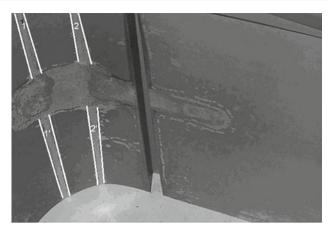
The insulating coating of the laminations can be damaged when there is improper handling of the core steel during steel manufacturing or core assembling. The canals 1-1' and 2-2' (highlighted in white on the edges) were done intentionally to show the appearance of the lamination when insulation is damaged
